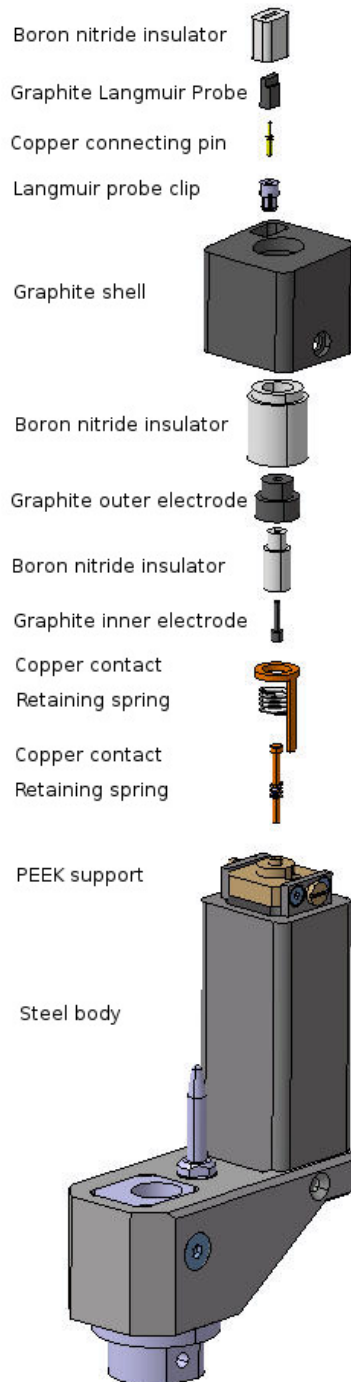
Exploded view of the injector head on top of the DSF probe showing the stepped construction allowing the components to be held in place without the use of adhesives.
